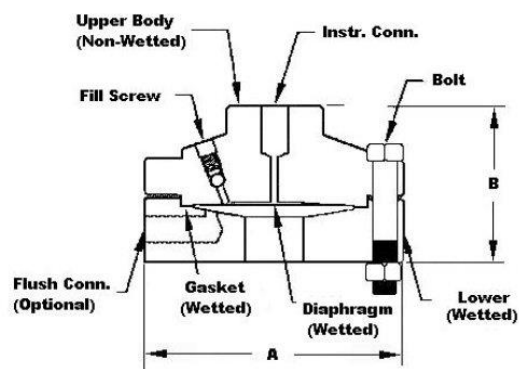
Seal Dimensions (Threaded Process Connection Seals)
